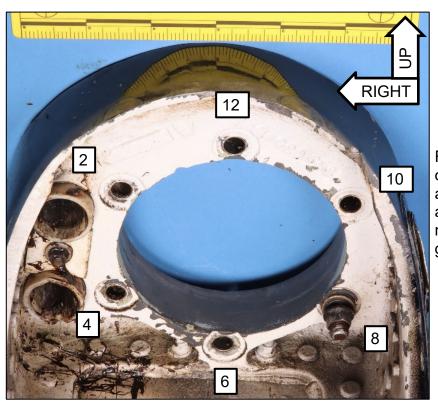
Lower forward surface of the support casting at the upper aft end of the vertical stabilizer after cleaning showing numbered mounting holes for the 90° gearbox assembly.
